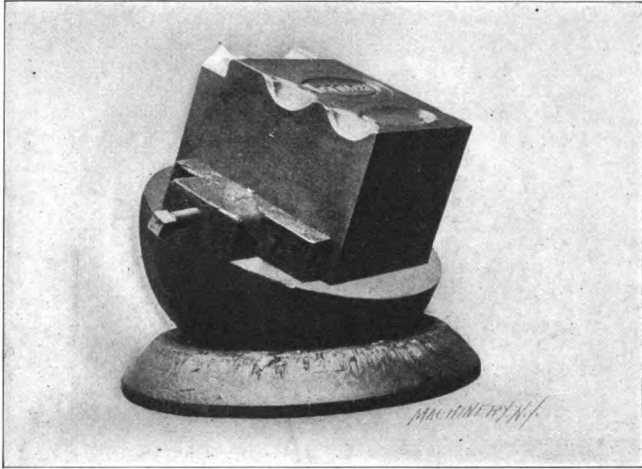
Special "Ball Vise" Used in Sinking Drop Forging Dies
